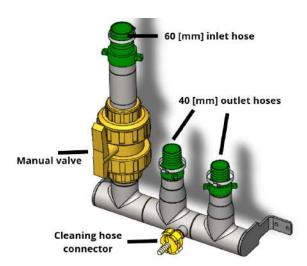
Detailed vacuum distributor assembly for the 2 HT88 configuration
